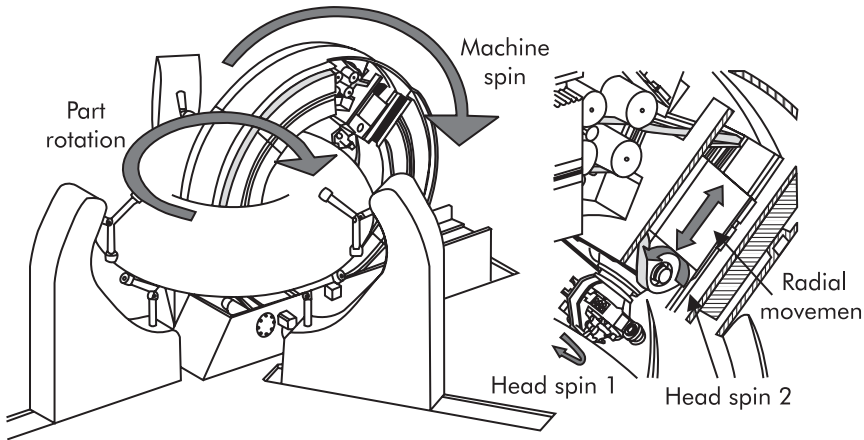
Fiber-placement machine configuration. (Courtesy M. Torres)
